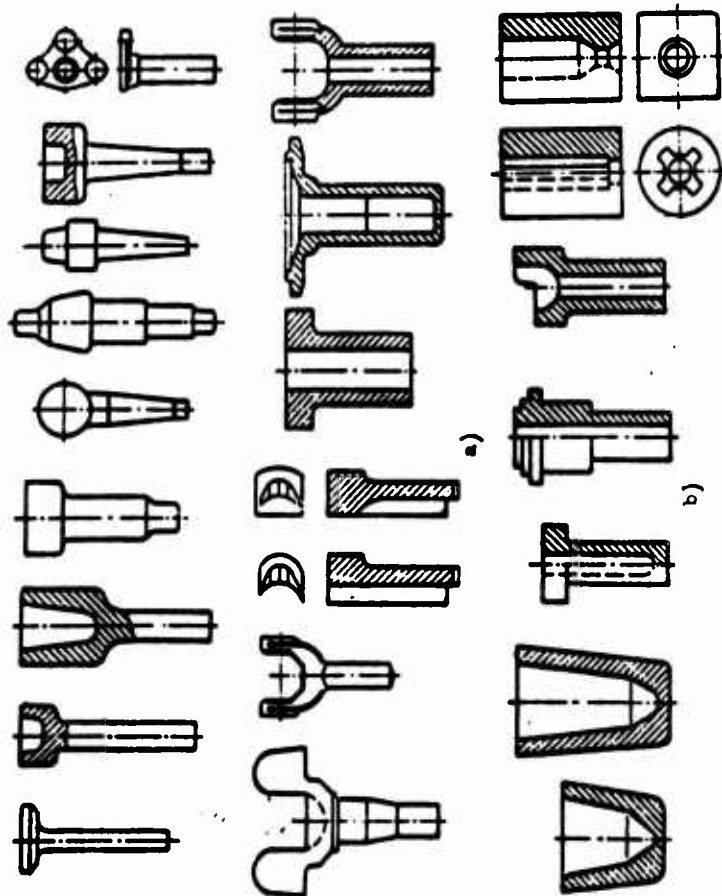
Examples of certain forms of forgings, stamped by pressing (a) and punching (b).
